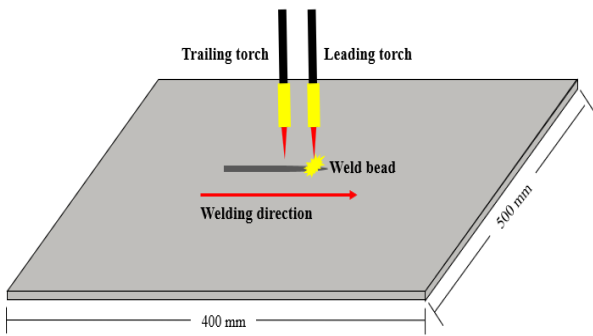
A schematic diagram for tandem GMA welding process
